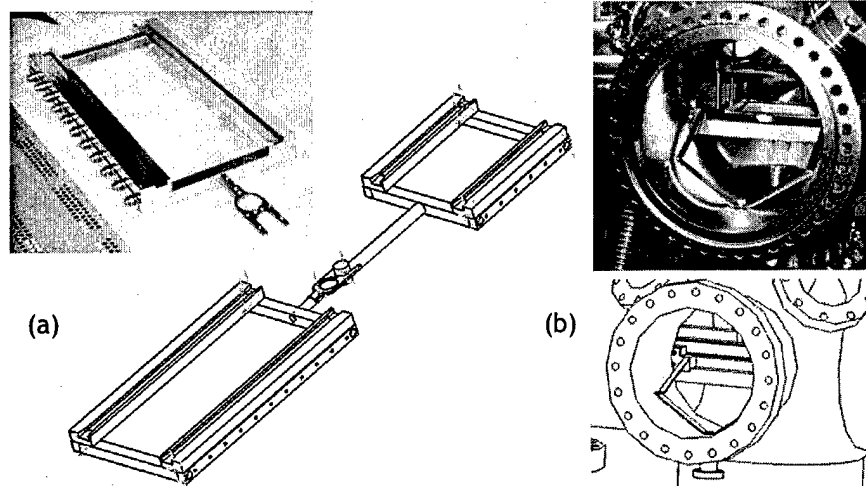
(a) Photograph of the caboose that rides the rails of the 13' chamber, and transports the substrate holders and shadow mask holders. Solidworks view of both the engine and the caboose in their "hand-off" configuration. (b) Photograph (and Solidworks perspective view) of the lateral alignment mechanics that ensure perfect insertion of the transfer fork into the
